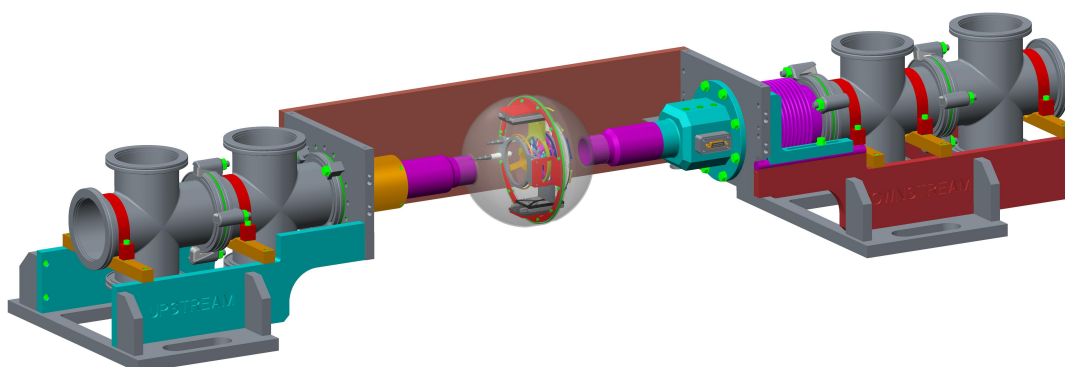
Drawing of TPEN installed at the HIE-ISOLDE beamline.
